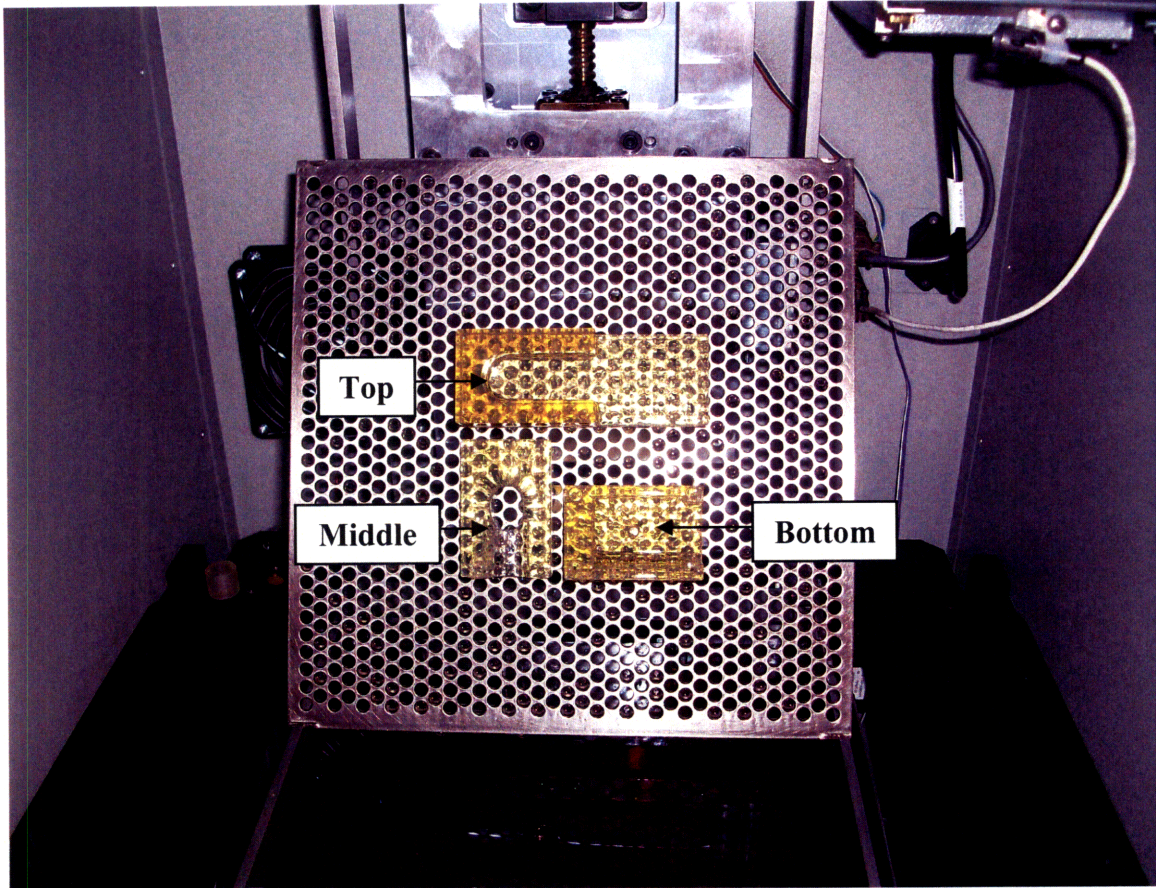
Three-piece fixture design that was created in the Viper Laser Stereolithography Forming Center.
